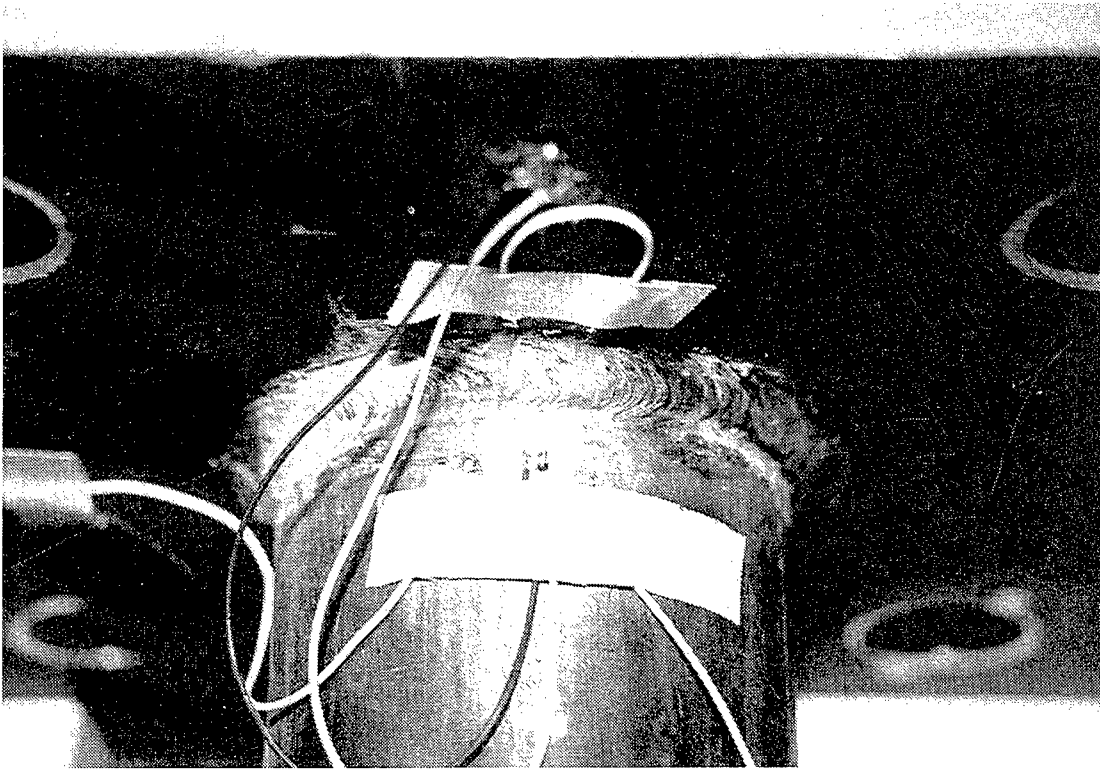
Close-up photograph of typical specimen instrumentation. Crack detection gages extend over the entire weld and onto the tube. Strain gage is as close to the weld as possible.
